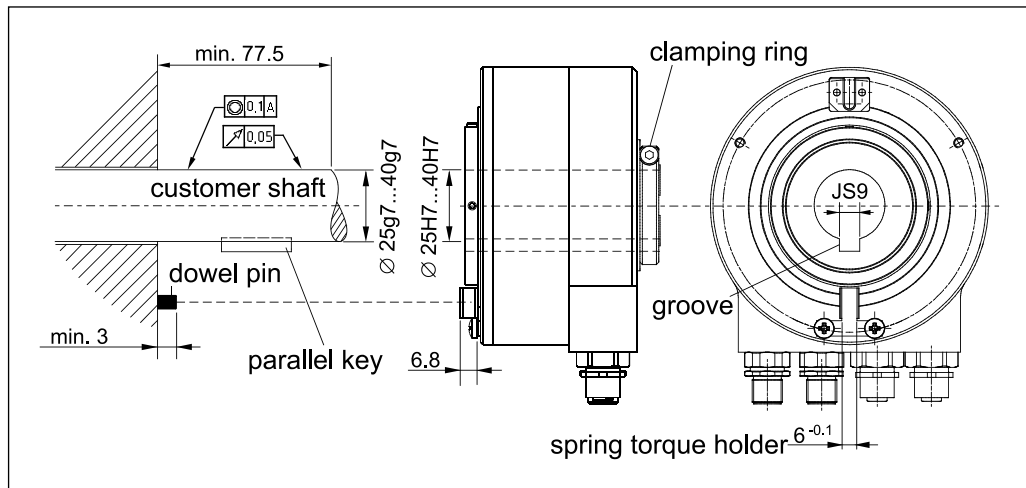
Type with dowel pin and spring torque holder with  $\varnothing 25H7...40H7$
